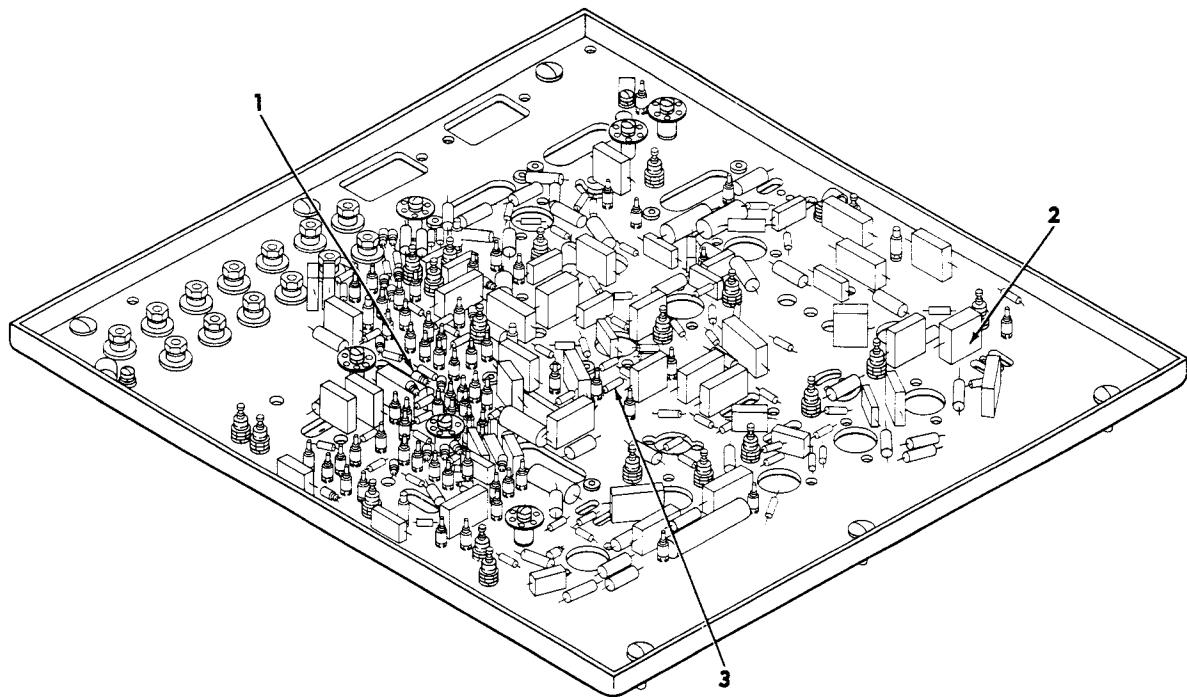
Synchronizer, electrical (9983715) - partial exploded view
